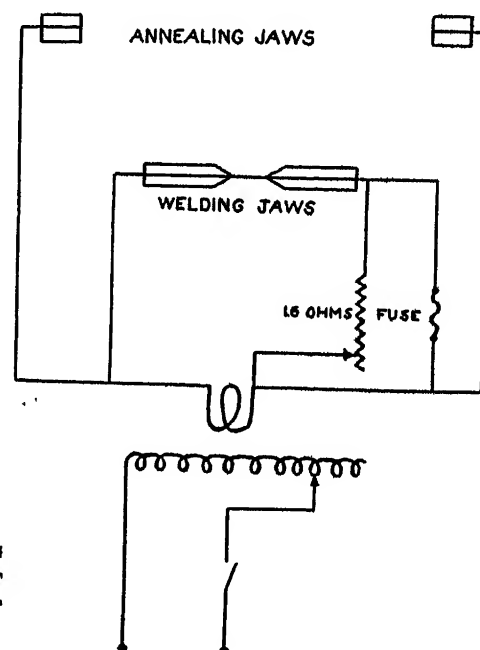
WIRING DIAGRAM OF PERMALLOY BUTT WELDER
